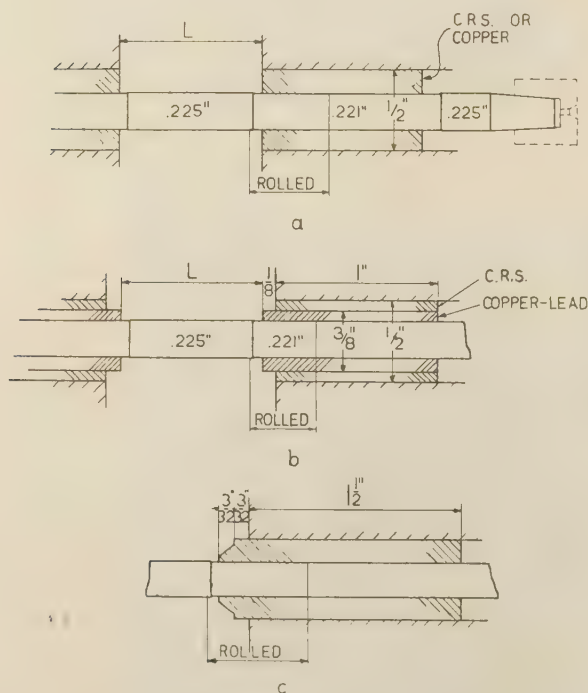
BUSHING DETAILS FOR GRINDING, ROLLING, AND GRIPPING SPECIMENS
